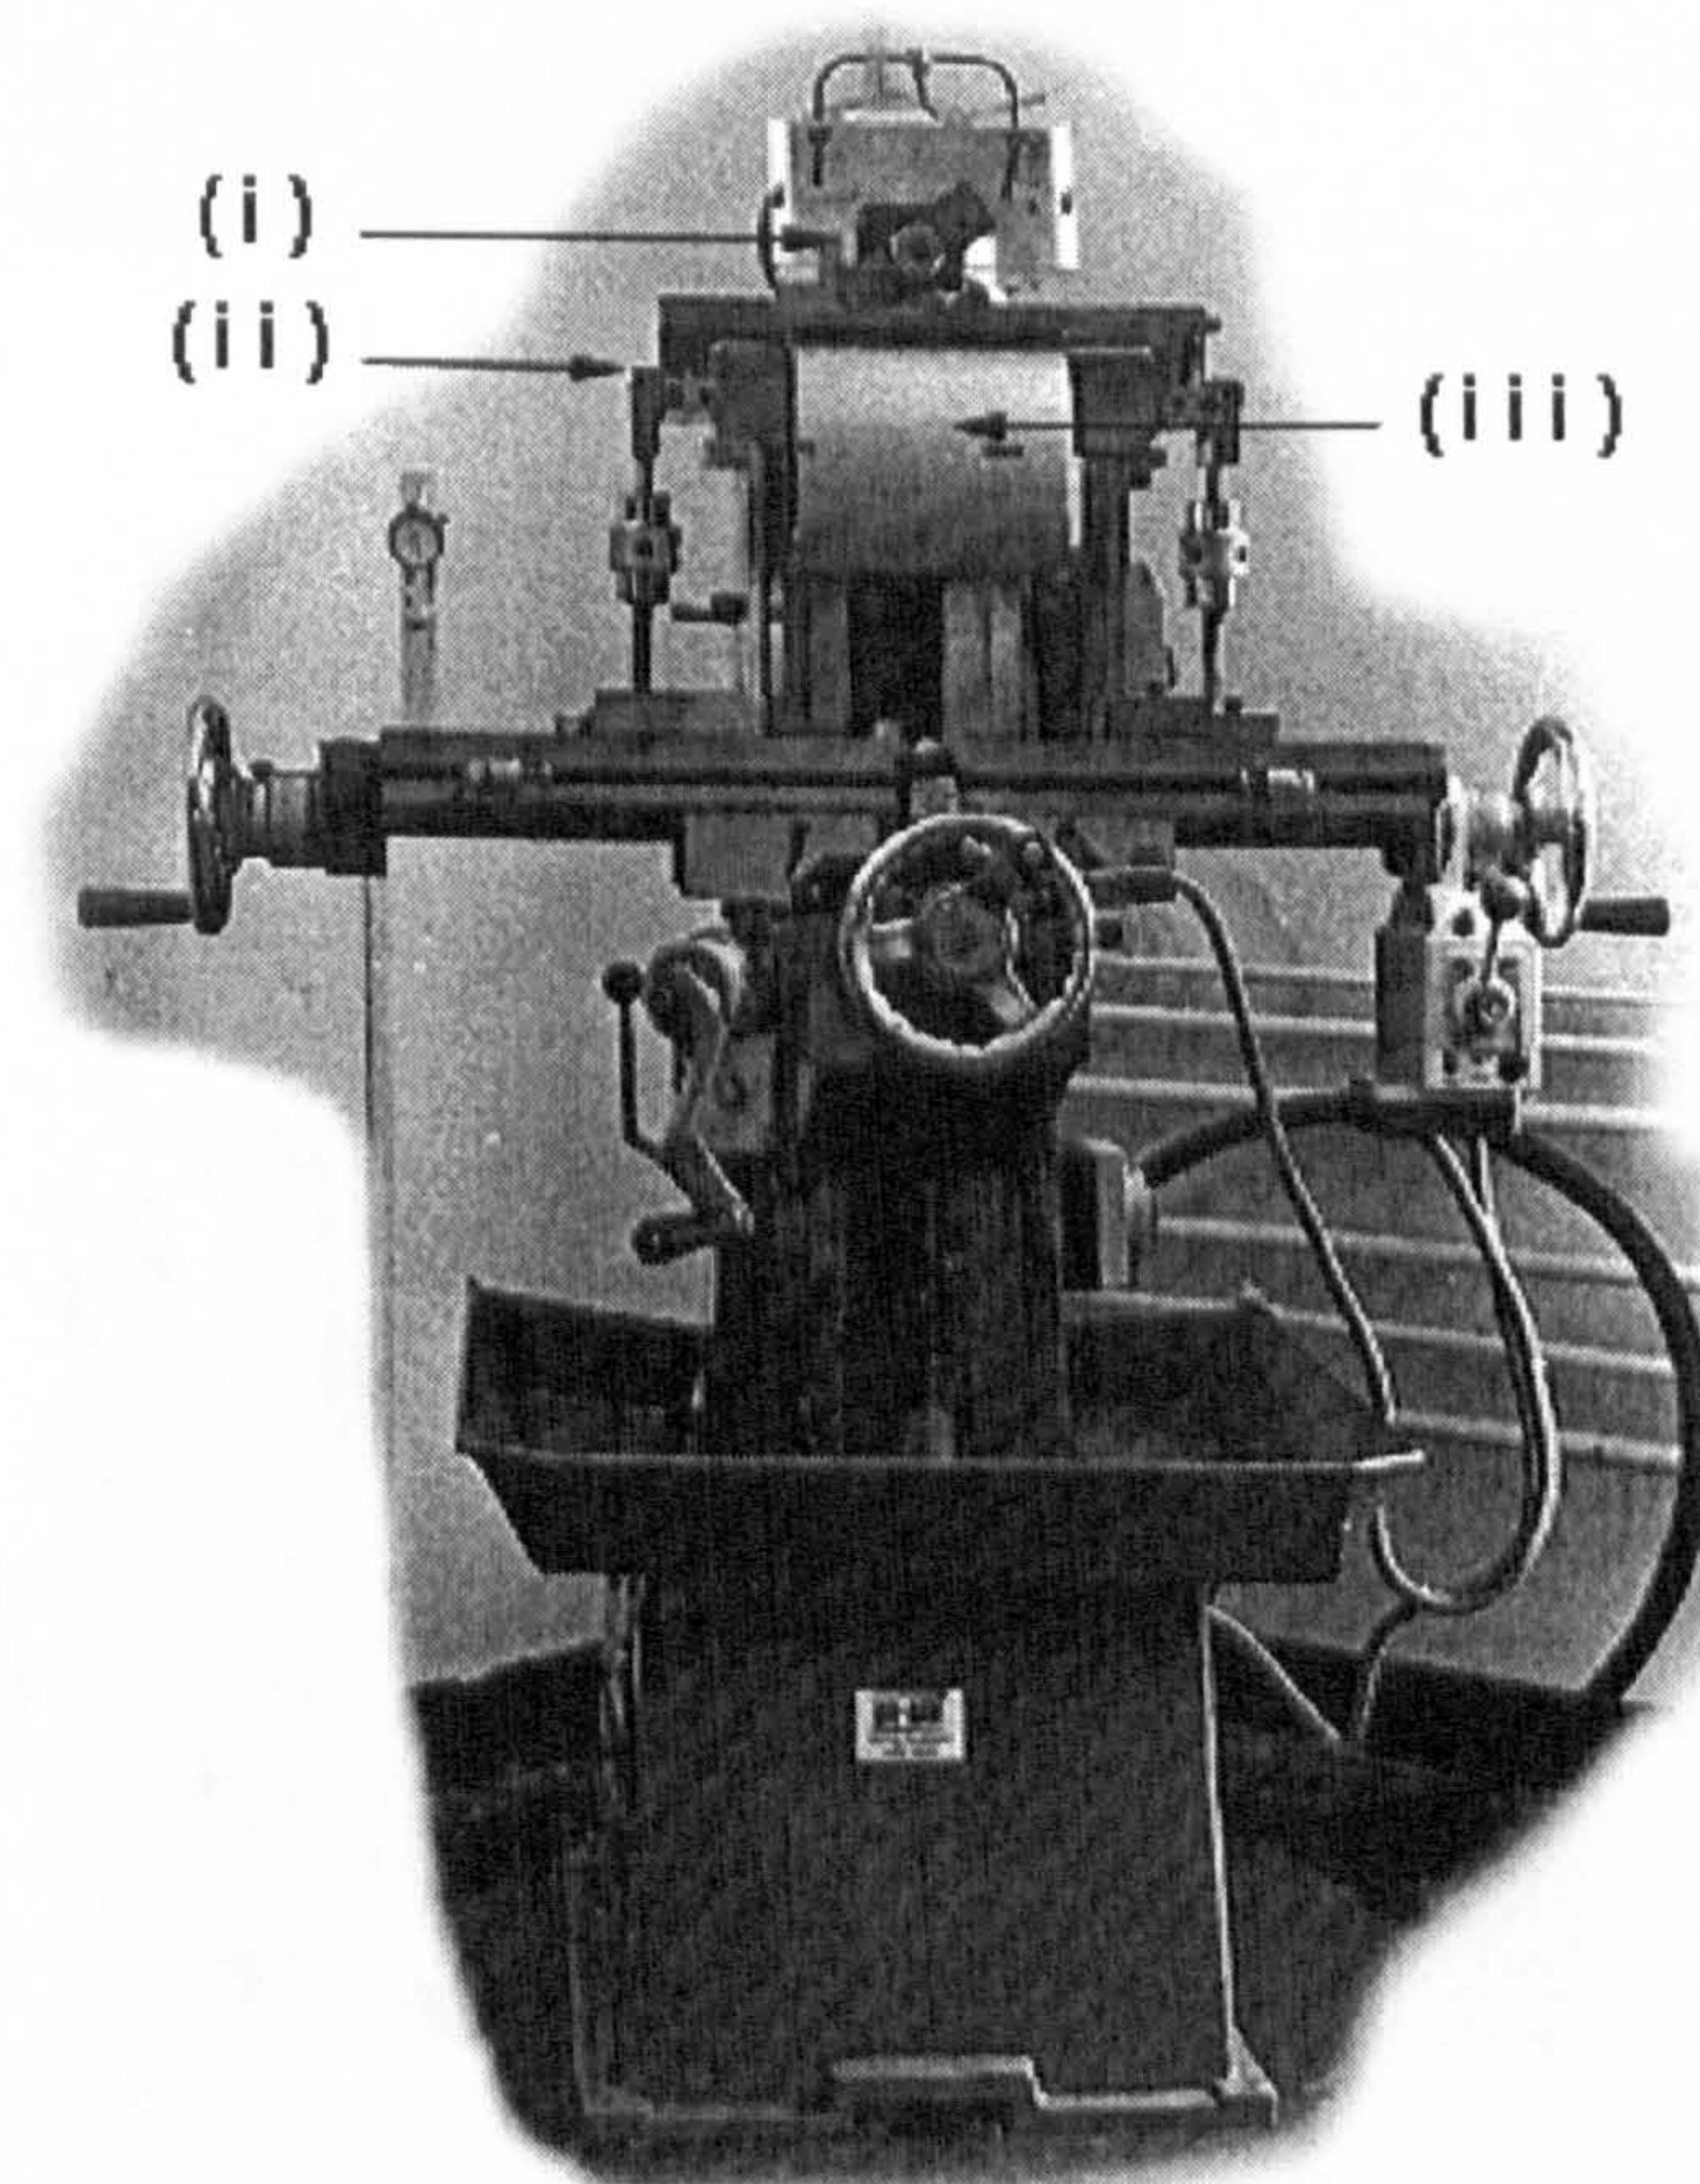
Photograph of the custom-made pipe cutting machine. Key component are (i) the twin cutter, (ii) the clamping arrangements fixture and (iii) a pipe sample.
